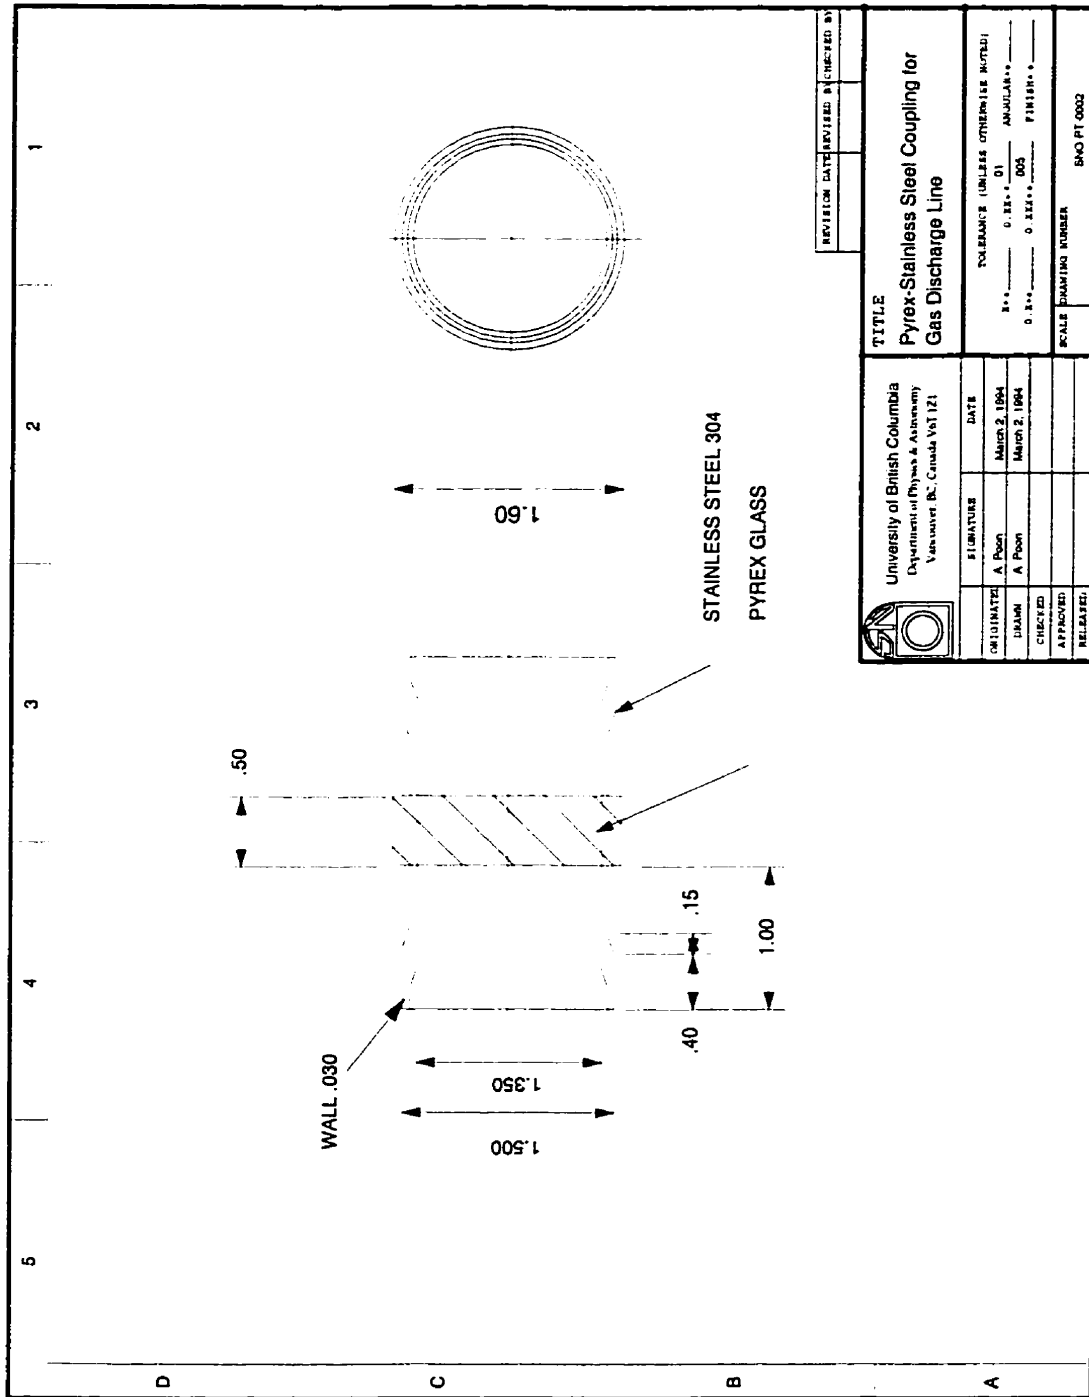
Technical drawing of the Pyrex-stainless steel coupling used in the gas discharge line. (SNO-PT-0002).
